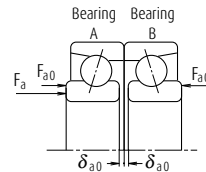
Back-to-Back Duplex Bearing Preload
